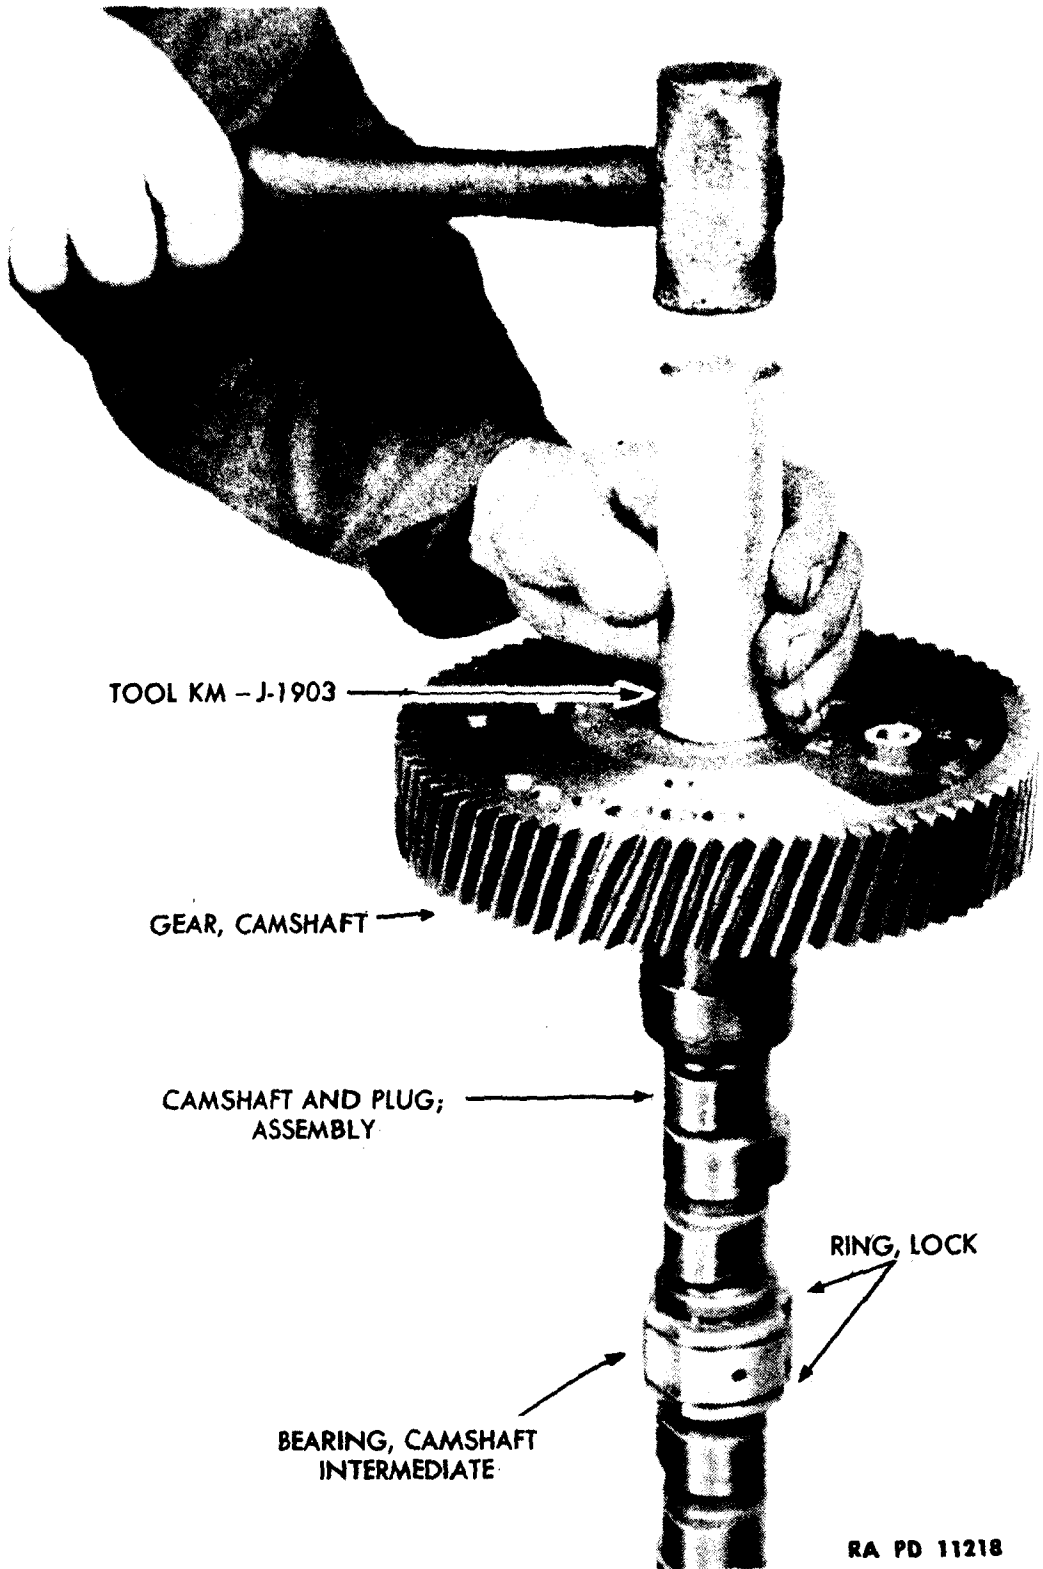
Installing Camshaft Gear On Camshaft and Plug Assembly
